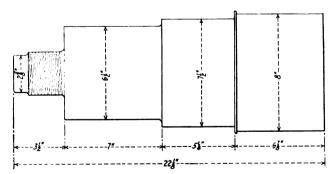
Main Locomotive Crank Pin Machined in 50 Minutes
